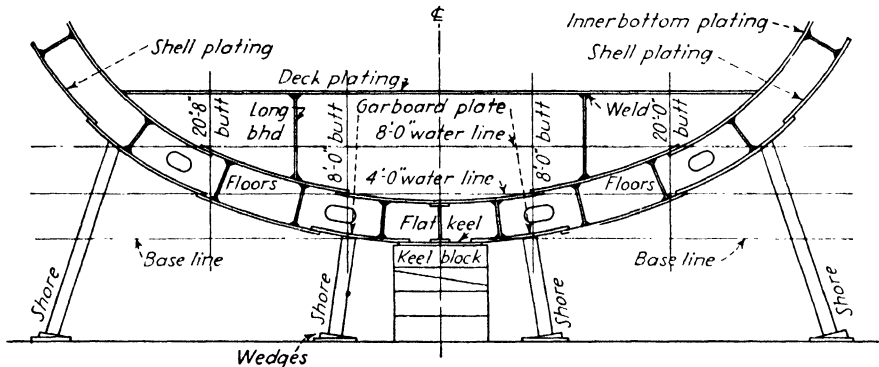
Bottom assembly with longitudinals, inner bottom, and deck plating assembled in one section.
